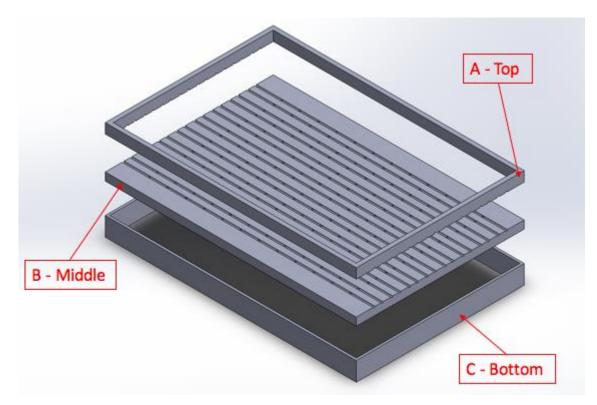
Shows the exploded, isometric view of the grooved channel design. Labeled (A) represents the top of the assembly, (B) represents the middle of the assembly, and (C) represents the bottom of the assembly
